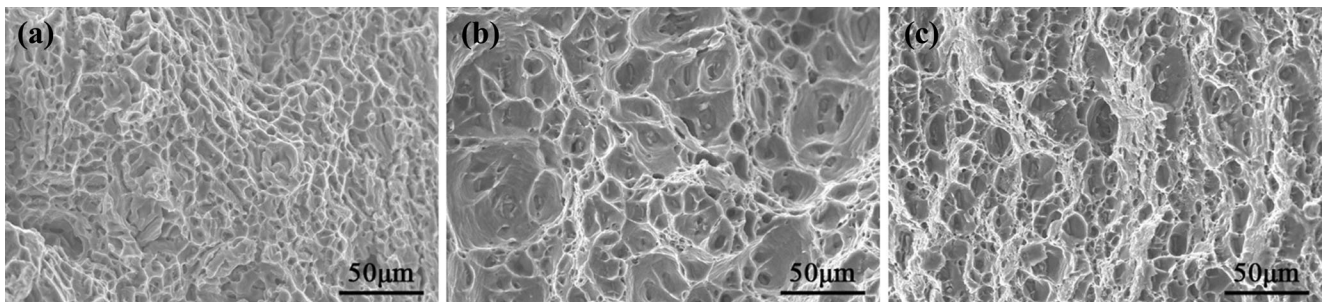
SEM images of the fractured surface: a hybrid laser-MIG welded joint, b MIG welded joint, and c base metal
